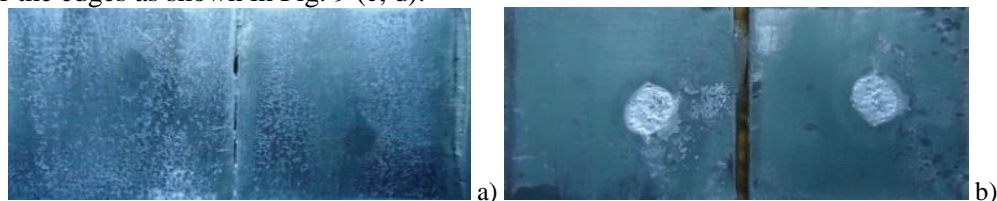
Photographs of fatigue fracture surface of (a) adhesive bond and (b) weld bond
